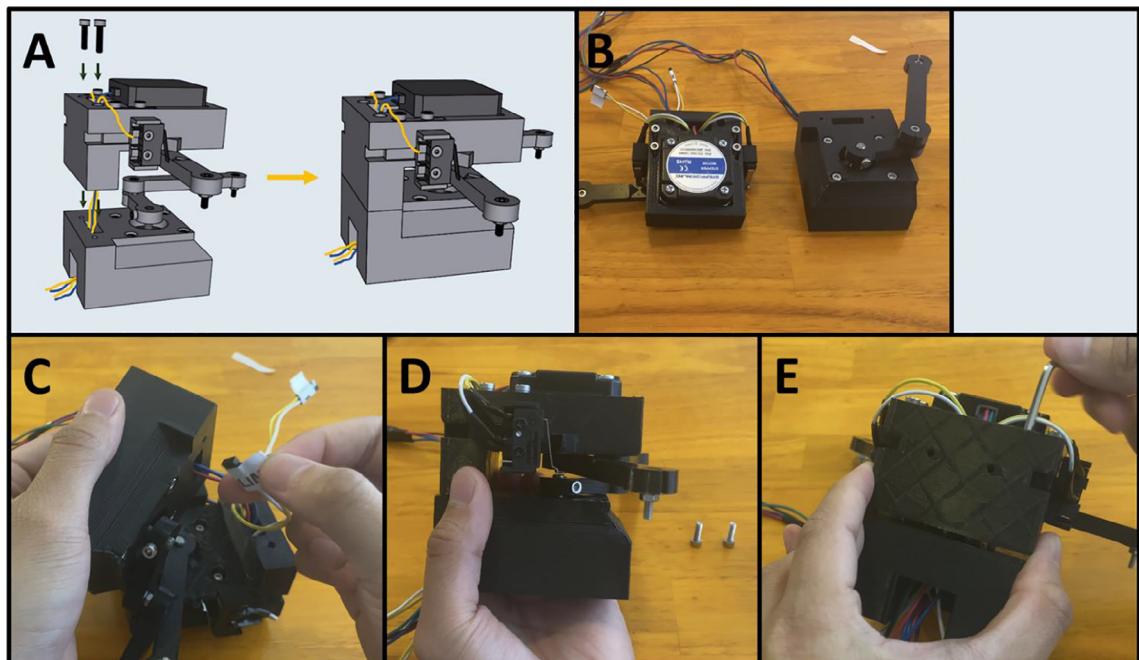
a-e: The procedure for joining the Upper and Lower Motor Assemblies.
